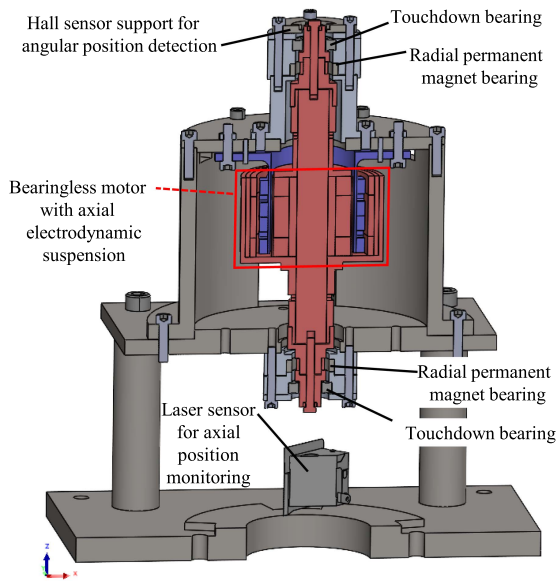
3-D model of the experimental setup used in the verification of axial electrodynamic suspension. Besides the bearingless motor and radial permanent magnet bearings, there are touchdown ball bearings, Hall sensors for angular position detection, and a laser sensor for axial position monitoring.
